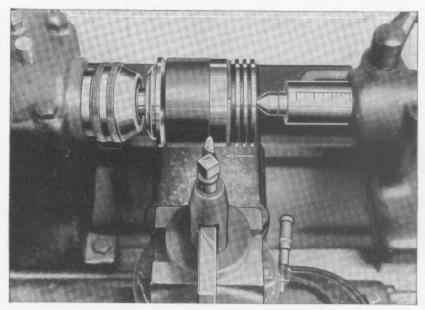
Finishing a Semi-Machined Cast Iron or Semi-Steel Piston in the Lathe
